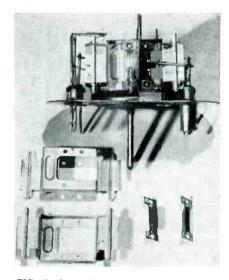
Internal structure, frame stampings and deflection plates of experimental beam-deflection tube
